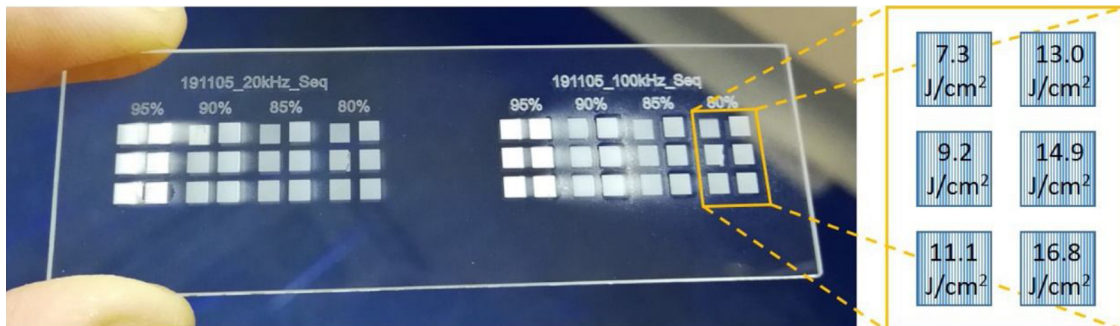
Photograph of Borofloat®33 glass plate just after picosecond laser machining using SM. The illustration on right shows the peak laser fluence values used for machining squares.
